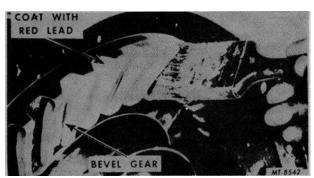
Painting Gear Teeth for Obtaining Tooth Contact Impressions
